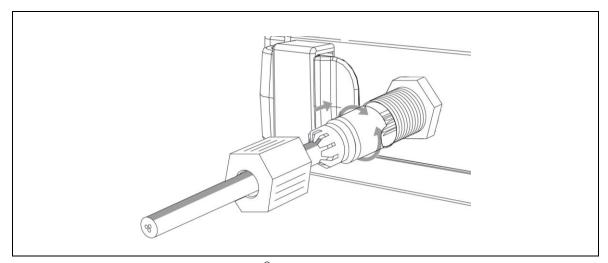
Assembling the QUICKON<sup>®</sup> fast-connect plug (4)
